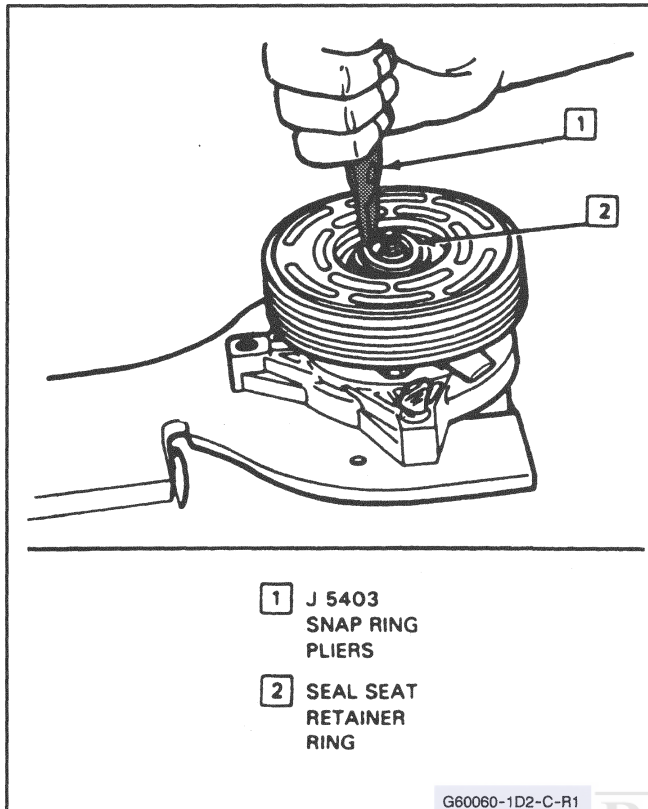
Removing or Installing Shaft Seal Retaining Ring
